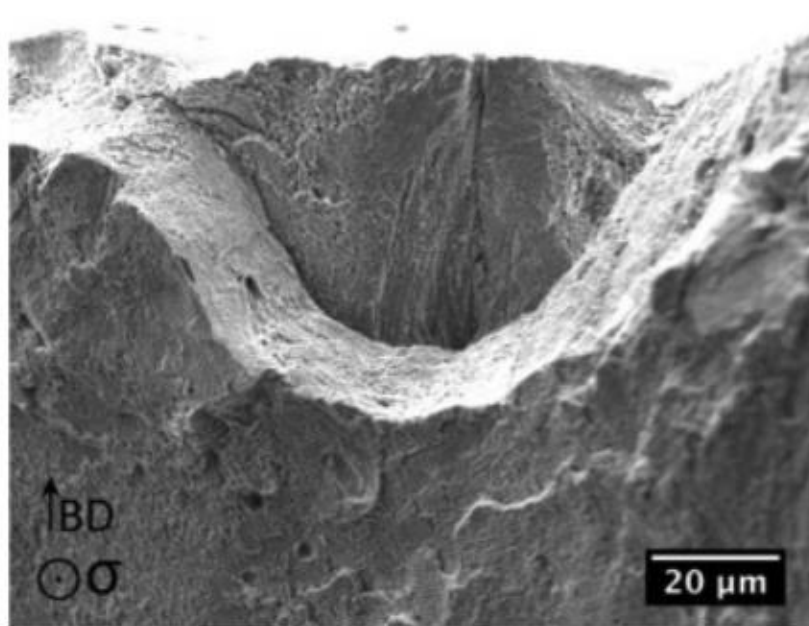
A micrograph showing the fracture surface for the IN718 vertically tested sample. This shows the fracture along the bottom of a melt pool [87].
